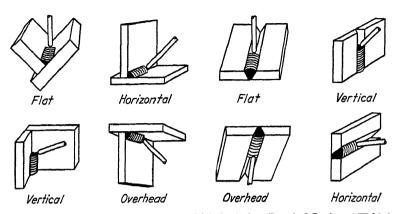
Welding positions. From H. Malcolm Priest, Practical Design of Welded Steel Structures, American Welding Society.
